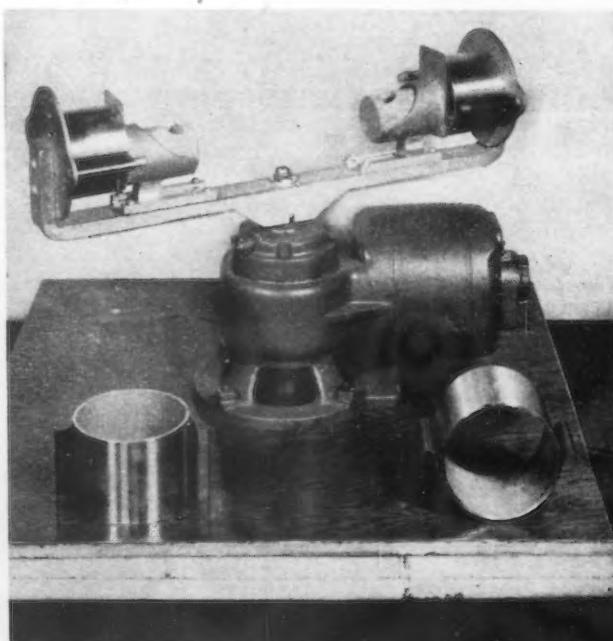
Motor driven 2-flask centrifugal casting machine manufactured by Thomas J. Dee & Co., showing the position of the crucibles relative to the flasks which are retained on the revolving arm by spring straps.
